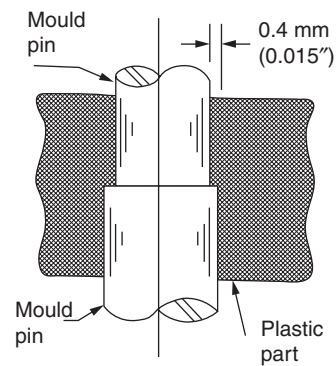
Small diameter holes made by compression moulding should use the proportions in the above drawing.
